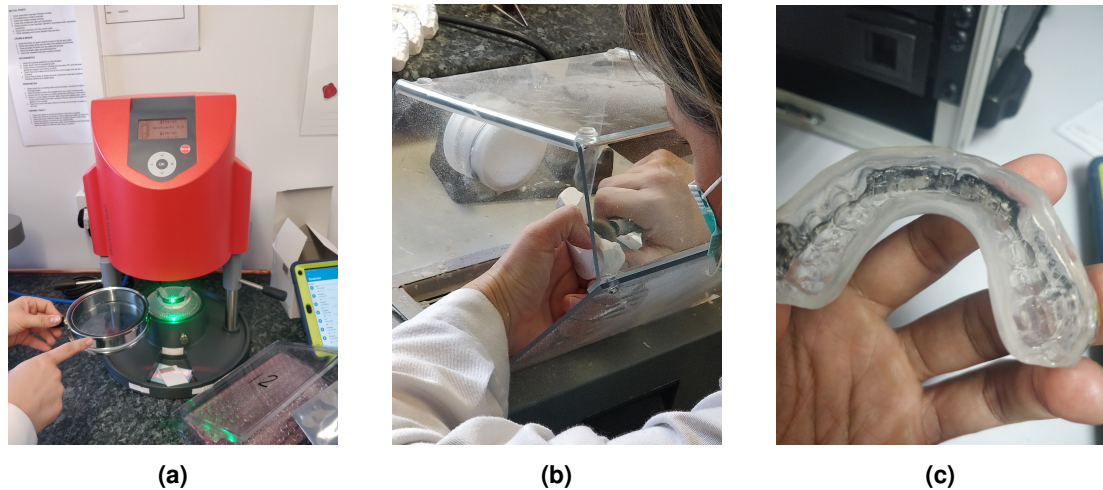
Mouthguard creation process: (a) sanding of the mould, (b) thermoforming equipment and procedure, and (c) finished mouthguard.
